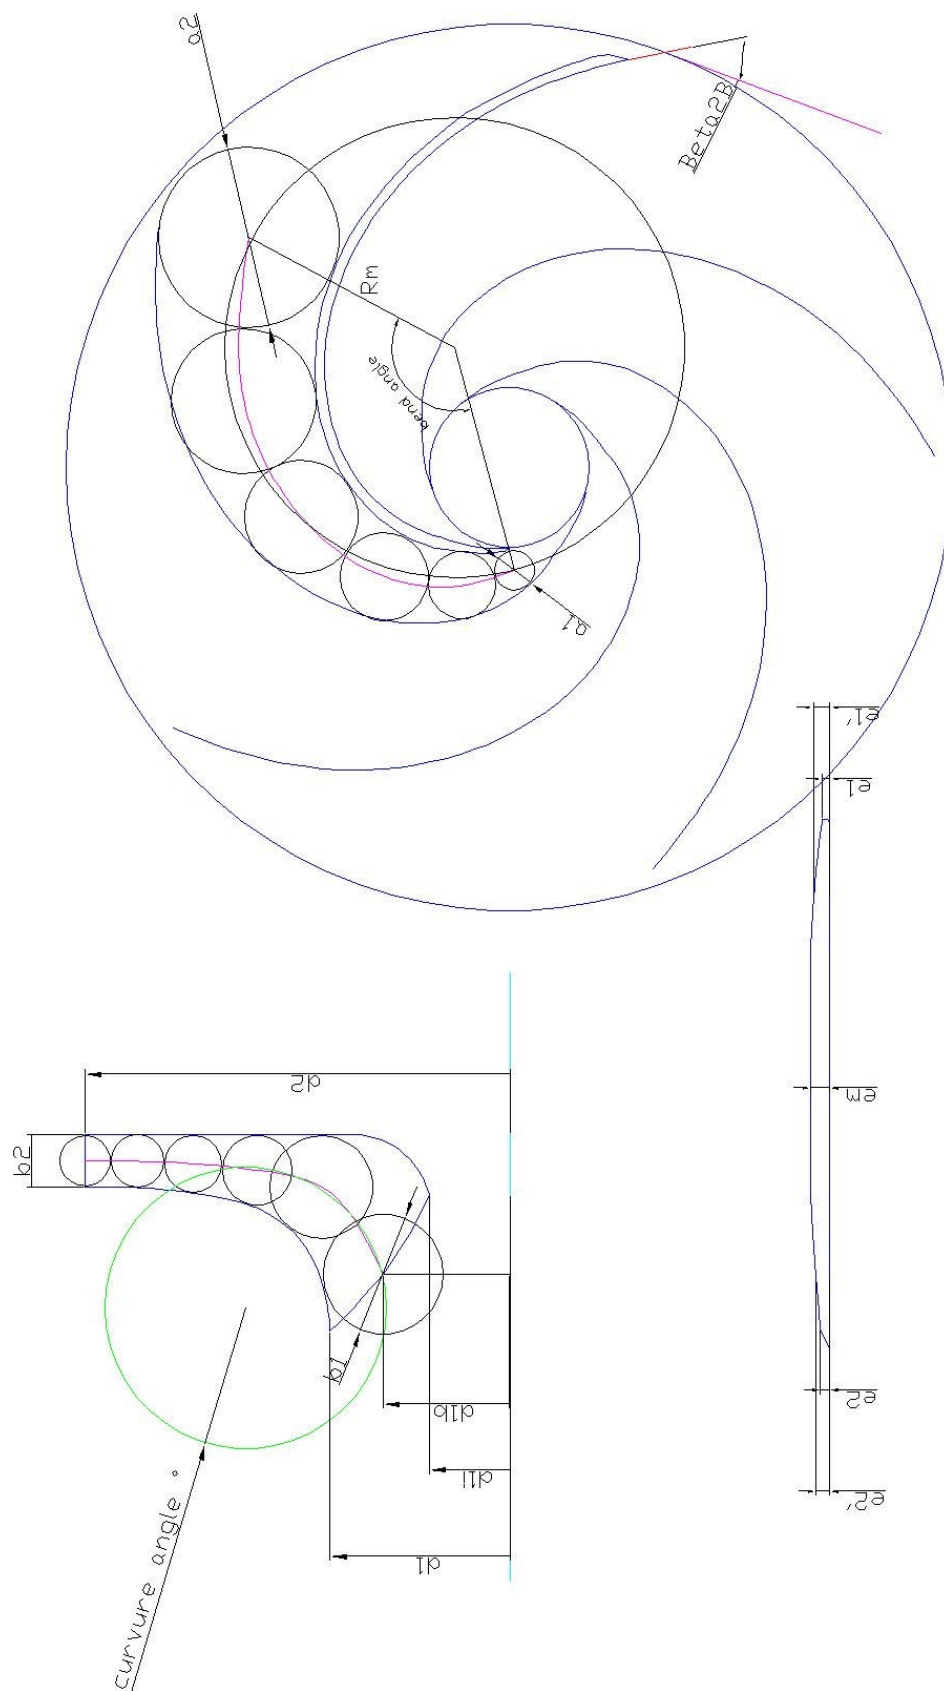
symbols of the impeller dimensions needed for the VBA Excel macro PumpsAsTurbines
